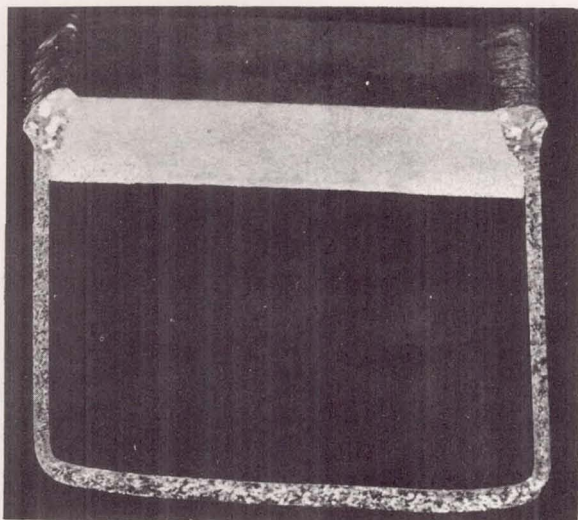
Tungsten ion emitter. Electron-beam welding.
